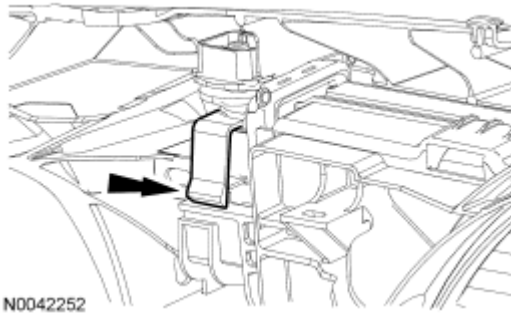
Locating Cooling Fan Motor And Shroud Tab
